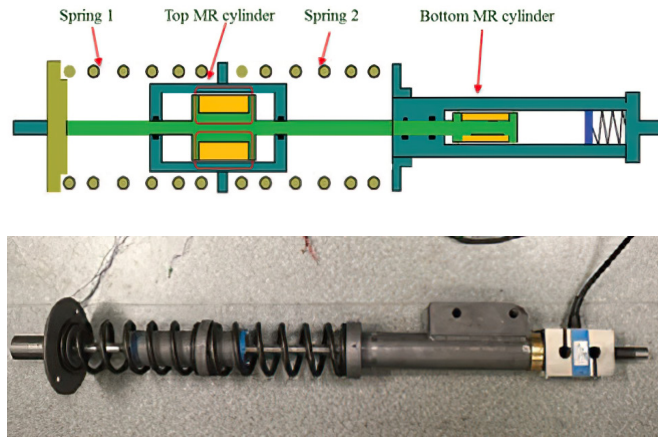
Design drawing and prototype of the VSVD MR damper with two spring.
